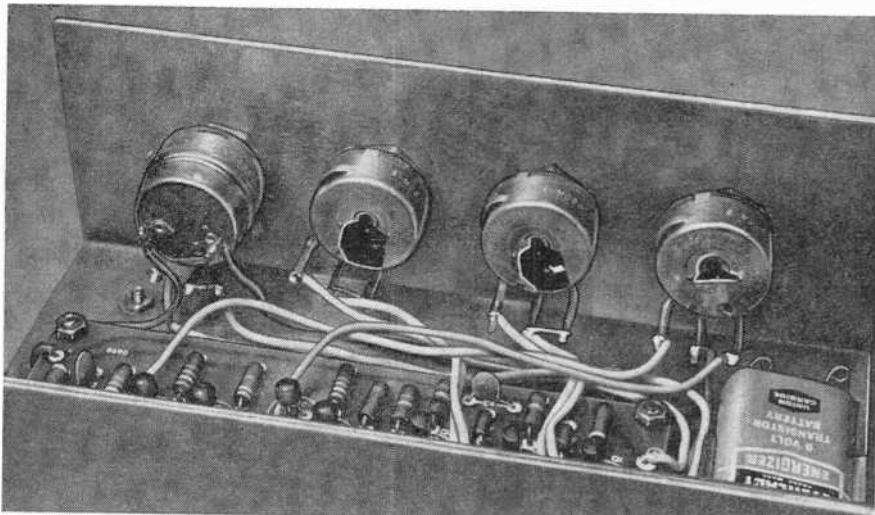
All controls, except pots R28 and R29, are mounted on front panel. Battery holder and printed circuit board are mounted inside the chassis; use rubber feet on under side.
